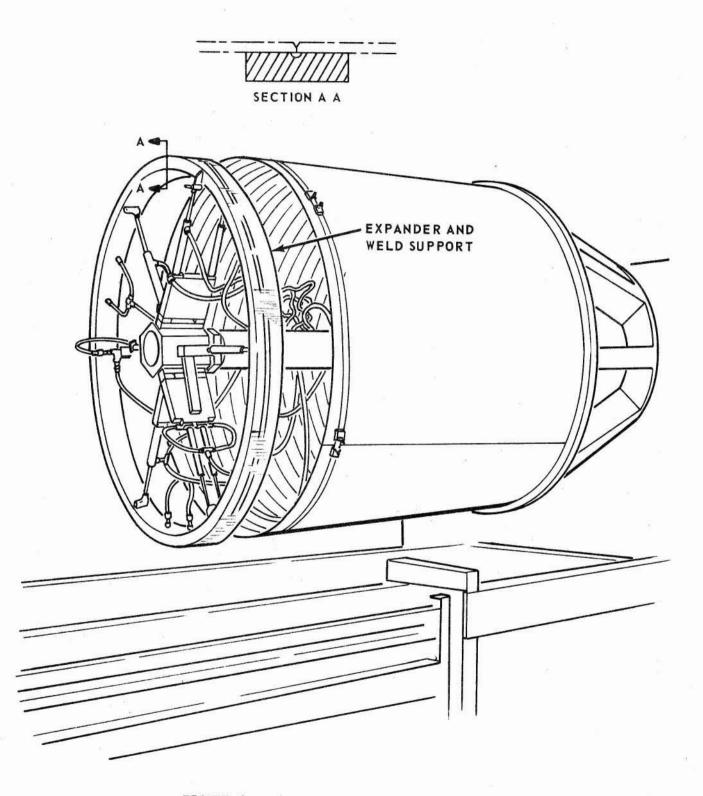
CONVENTIONAL WELD-JIGGING
